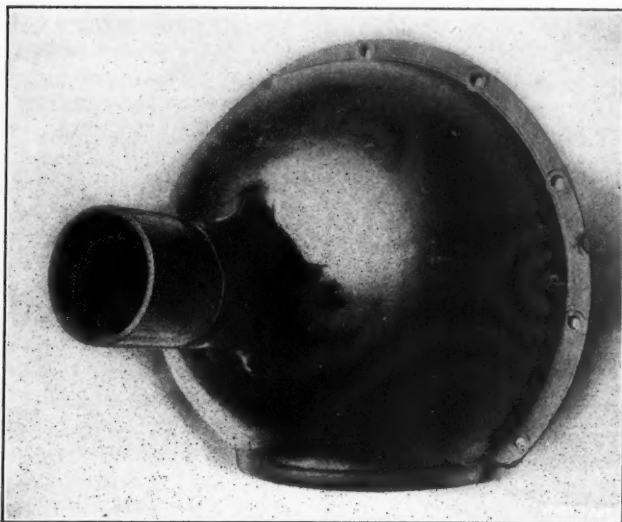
Tubing welded to a Stamping; Weldings of this Character can easily be handled on Butt-welding Machines especially designed for this Work—Toledo Electric Welder Co.
